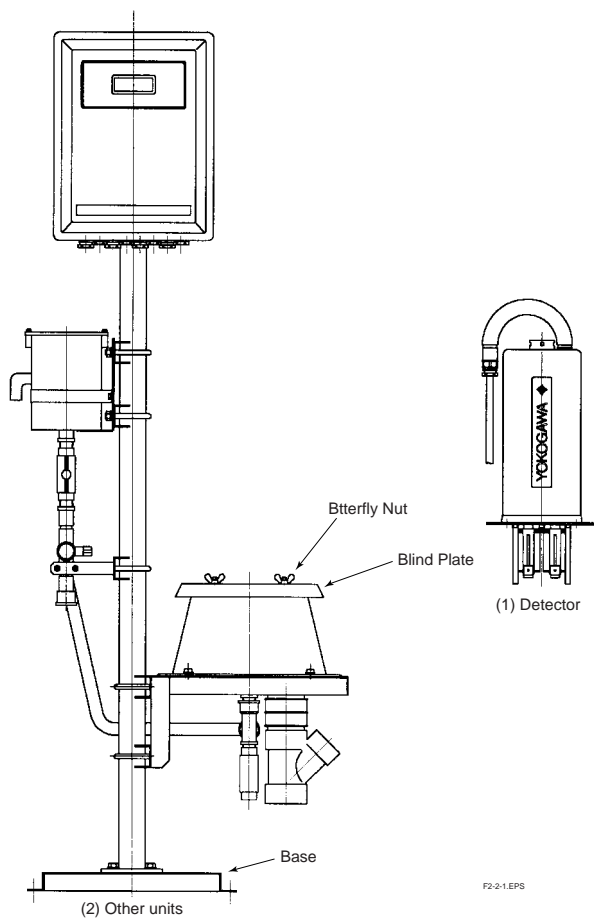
Shipping Package (Pole-mounting Type)
